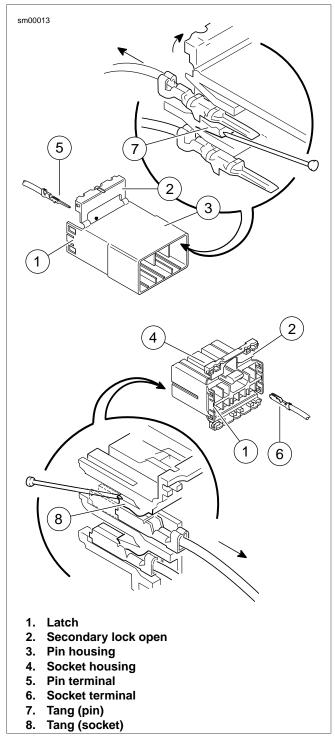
AMP Multilock Connector: Socket and Pin Housings
